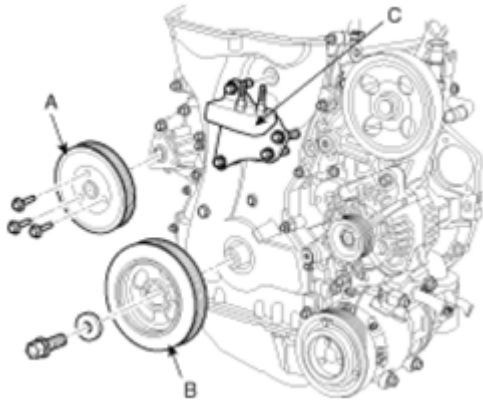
Installing Engine Support Bracket, Crankshaft Pulley, & Water Pump Pulley
